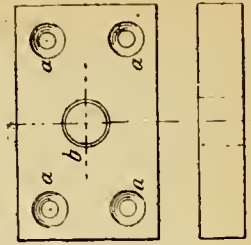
PLATE NUTS FOR CRANK SHAFT CENTRES. Two in Number.
